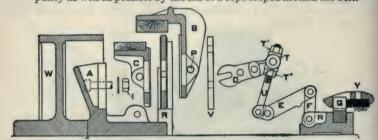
Sectional view of Hill clutch mechanism. In every case the mechanism hub A, and in a clutch coupling the ring W, is permanently and rigidly secured to the shaft and need not be disturbed when removing the wearing parts. When erected, the adjustment should be verified, and always with the clutch and ring engaged and at rest. If the jaws do not press equally on the ring, or if the pressure required on the come be abnormal loosen the upper adjusting nuts T on eye bolts and set up the lower adjusting nuts T until each set of jaws is under the same pressure. Should the clutch then slip when started it is evident that the jaw pressure is insufficient and a further adjustement will be necessary. All clutches are equipped throughout with split lock washers. Vibration or shock will not loosen the nuts if properly set up. The jaws can be removed parallel to the shaft as follows: Remove the gibs V, and withdraw the jaw pins P, then pull out the levers D. Do not disturb the eye bolt nuts T and T". The outside jaws B can now be taken out. Remove the bolt nuts I allowing the fulcrum plates R to be taken off. On the separable hub pattern the clamping bolts must be taken out before fulcrum plate is removed. The inside jaws C may now be withdrawn. Always set the clutch operating lever in the position as shown in fig. 2,816 to avoid interference with mechanism parts. Oil the moving parts of the clutch, Keep it clean. Examine at regular intervals.
